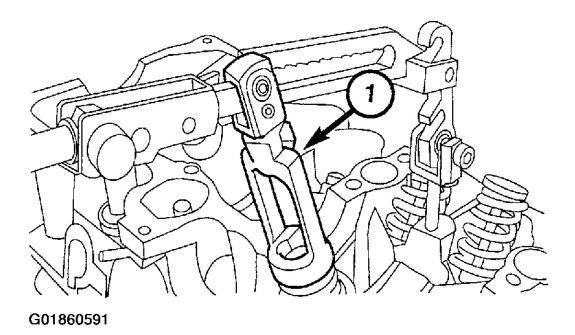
Installing Valve Spring Seat, Valve Spring & Valve Spring Retainer Courtesy of DAIMLERCHRYSLER CORP.
